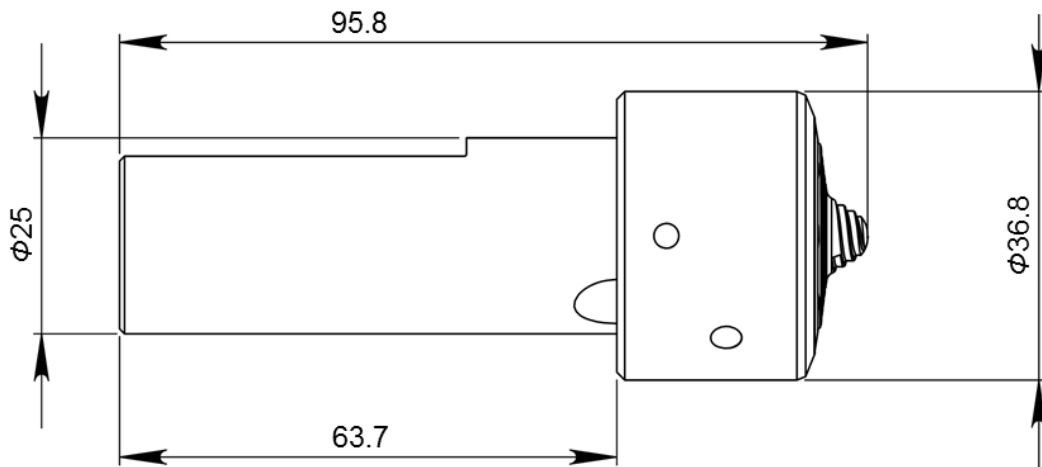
Basic dimensions of the FSW tool employed for all welds [2.13]
